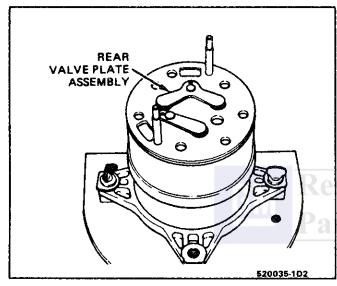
Rear Valve Plate Assembled to Cylinder Assembly
